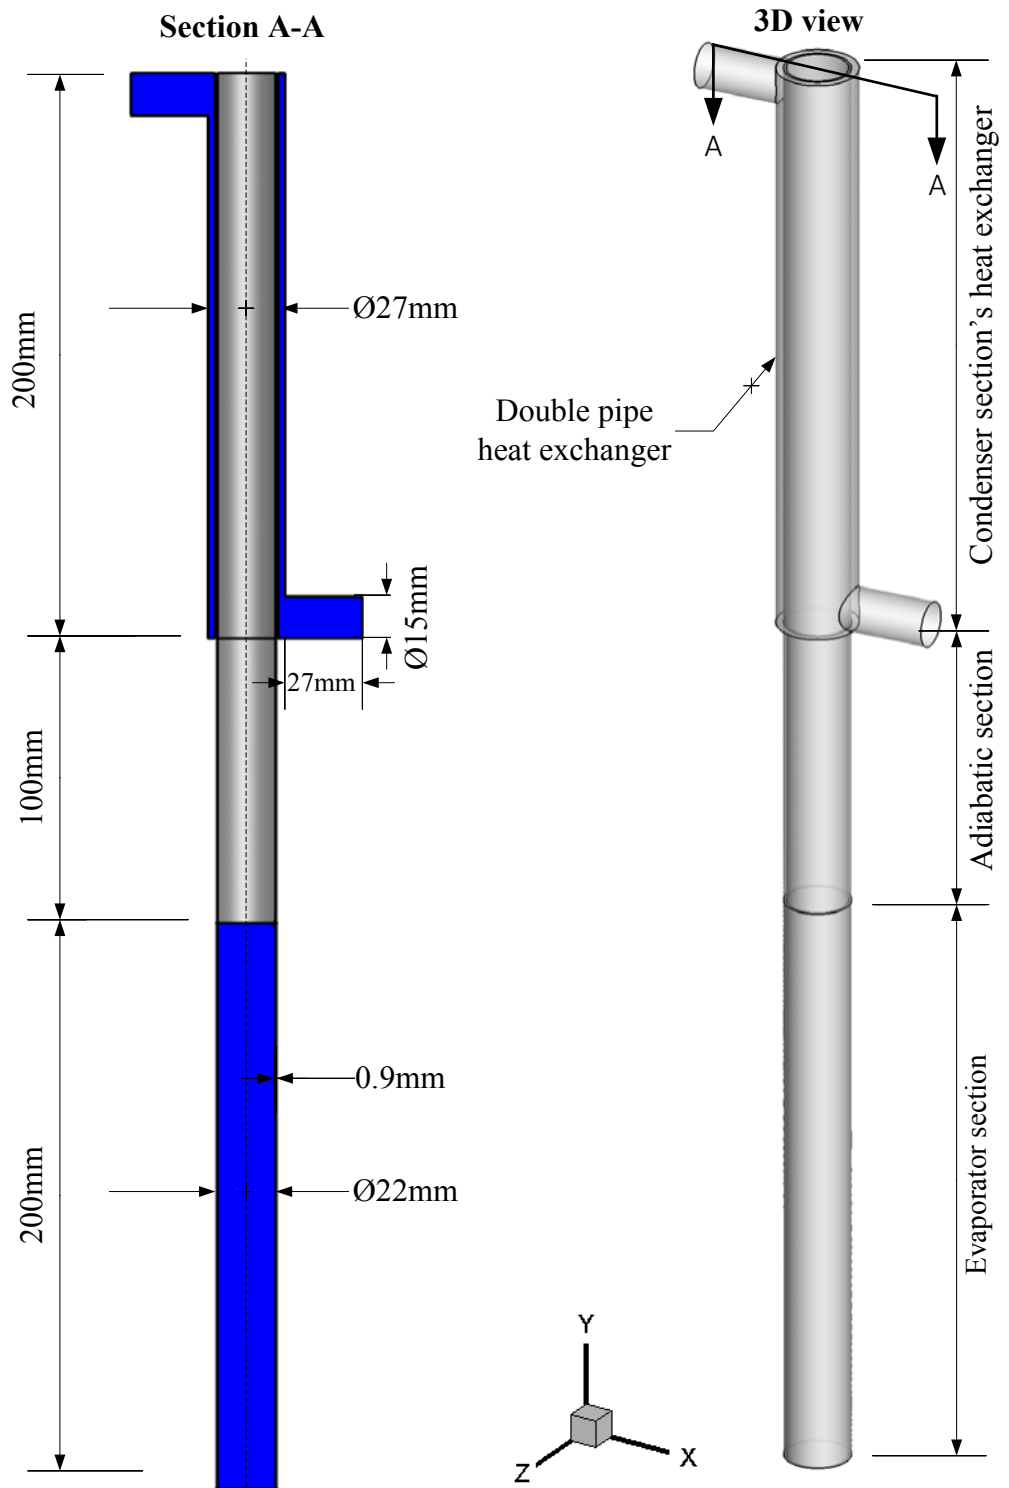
Three-dimensional view and cross-section of tested TPCT
